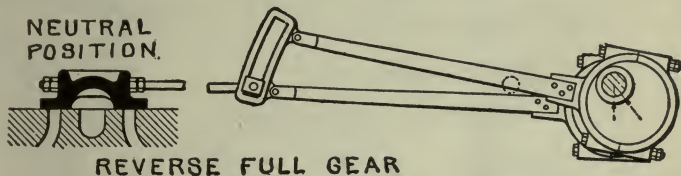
Setting the link motion: 4. *Locating the eccentrics—third step:* The link is shifted to reverse full gear position, bringing valve back to its neutral position.
